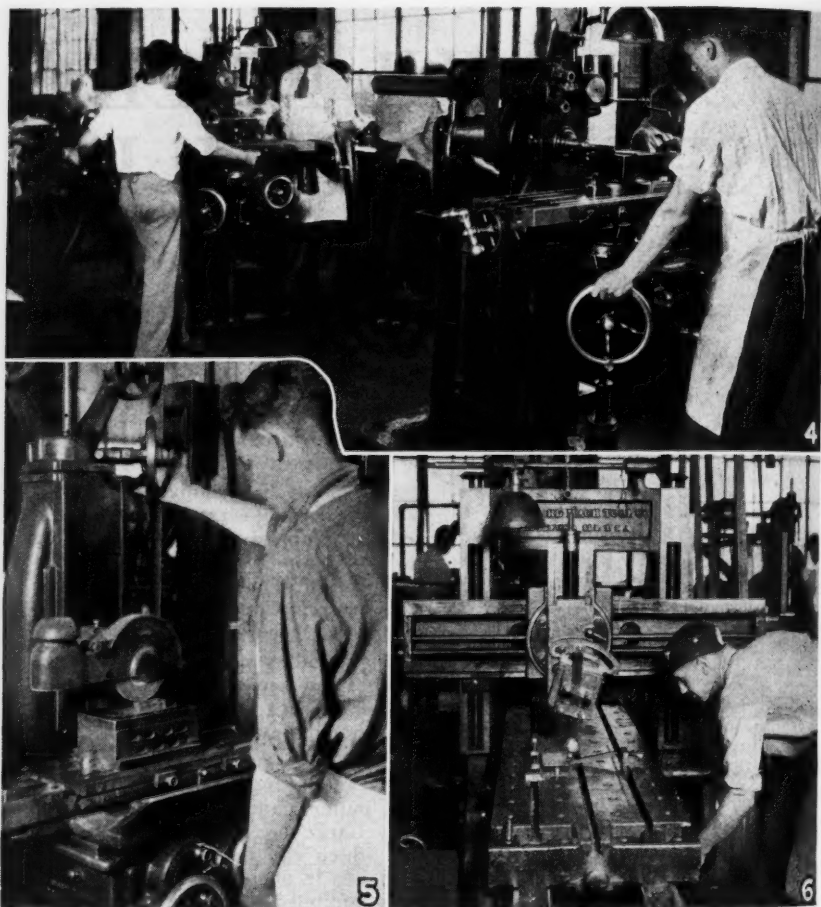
Learning to operate the milling machine. The student at the rear is receiving instruction on the use of the dividing head. Fig. 5—Operating a B. & S. surface grinder, equipped with magnetic chuck. Fig. 6—A Senior taking his final turn at the planer.
